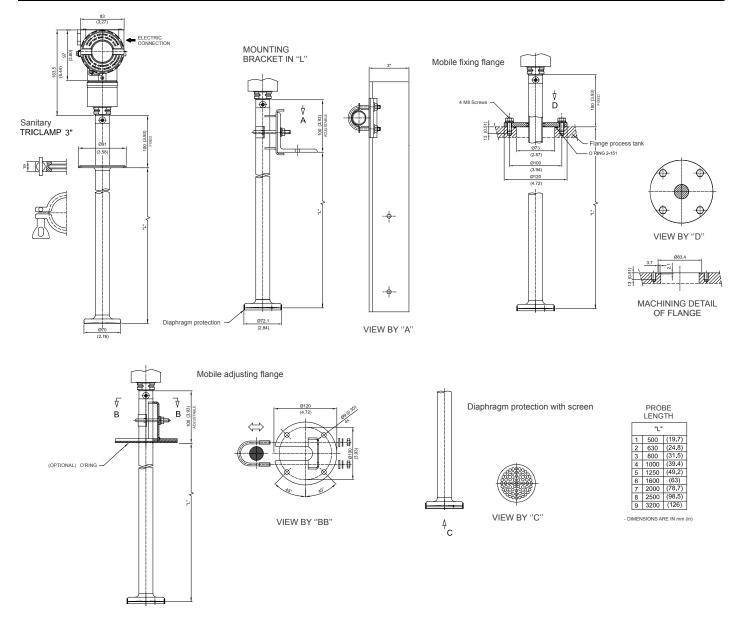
(e) - Dimensional Drawing and Mounting Position for LD293 – Level (Insertion)
